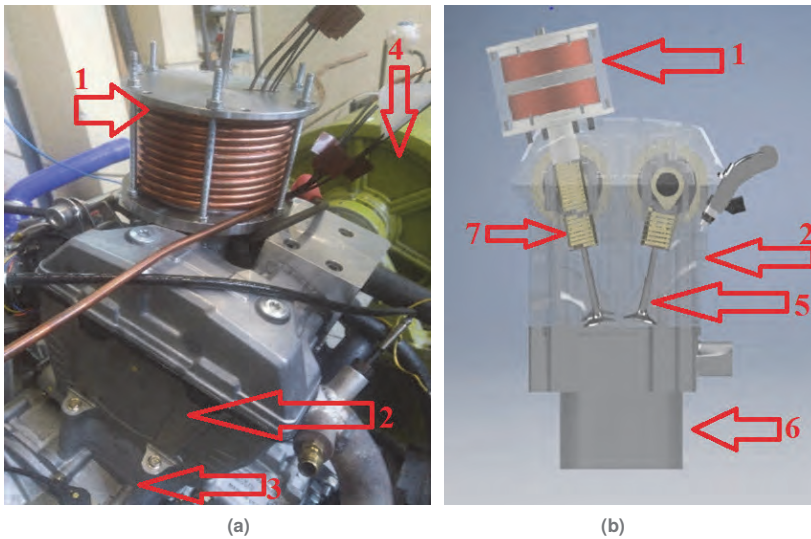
Single-cylinder internal combustion engine with electromagnetic actuator: (a) actuator built on the engine with cooling system, (b) method of mounting the actuator on the cylinder head (1 – electromagnetic actuator, 2 – cylinder head, 3 – engine, 4 – dynamometer, 5 – engine valves, 6 – cylinder, 7 – spring)
